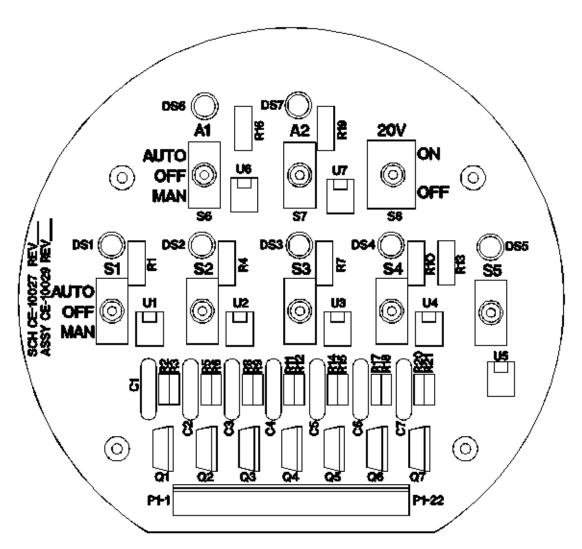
Analyzer Valve Driver Board (in lower explosion-proof housing)
